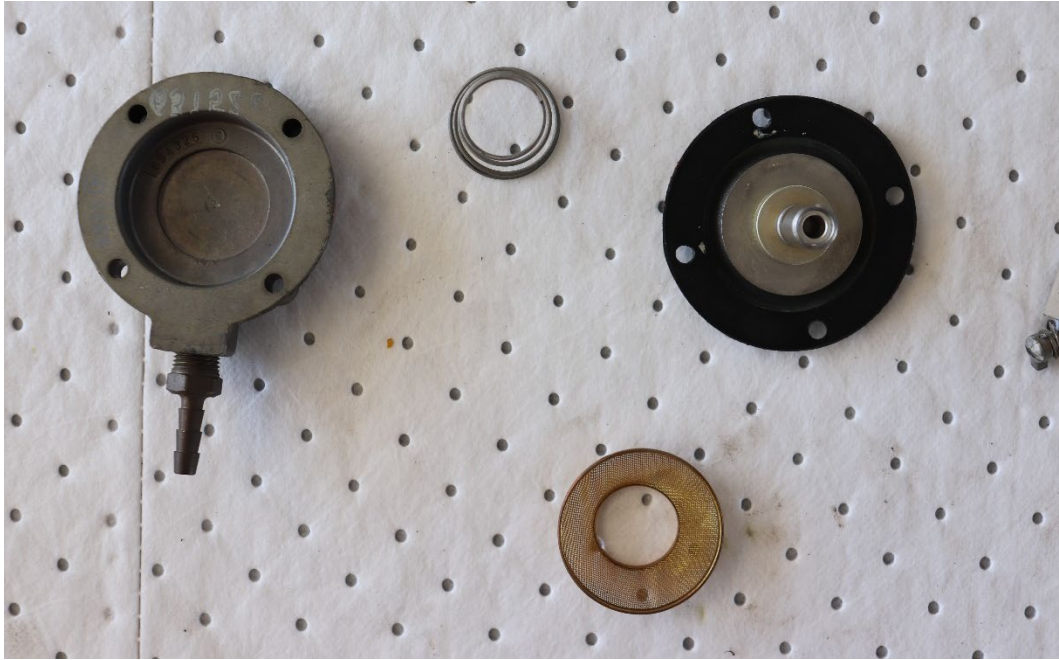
View of fuel flow manifold spring and diaphragm (photo courtesy of the NTSB)
